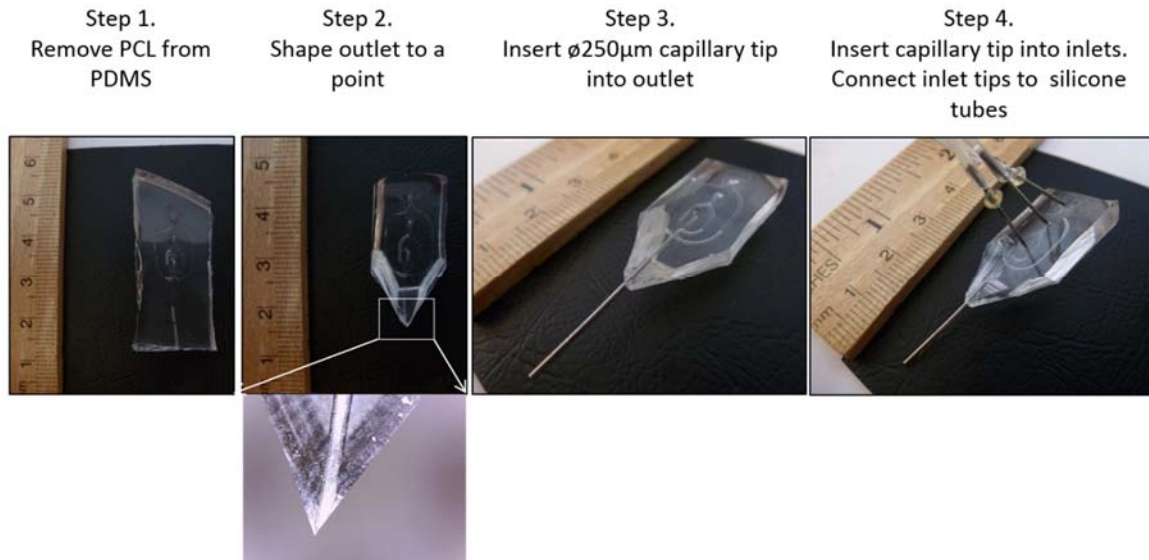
SMMB deposition head construction in four steps from left to right: Step 1: Design and fabricate channel network. Step 2: Shape outlet. Step 3: Insert capillary tip into outlet. Step 4: Inset capillary tips into each inlet and connect silicone tubes.
